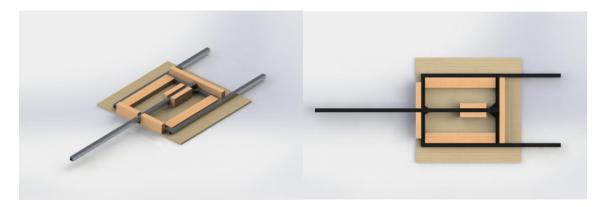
Isometric view (left) and top view of the frame jig holding the frame in place
